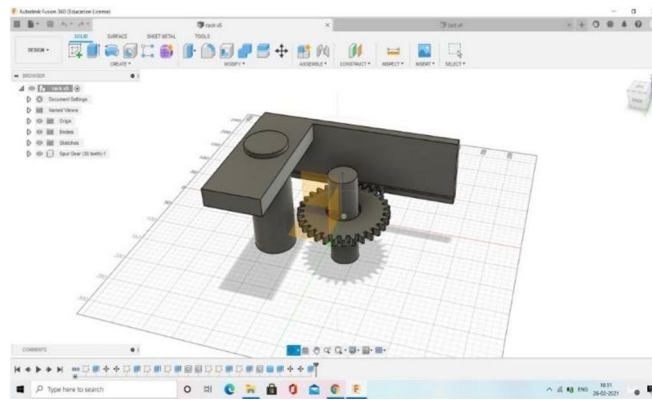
Design on fusion 360 for vary the distance by rack & Pinion gear (section view)
